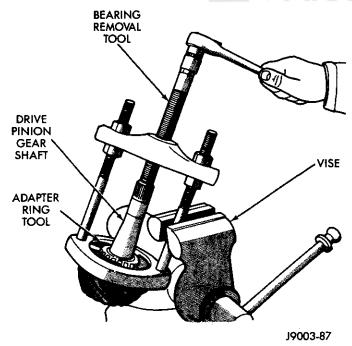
Drive Pinion Gear Shaft Rear Bearing Removal
